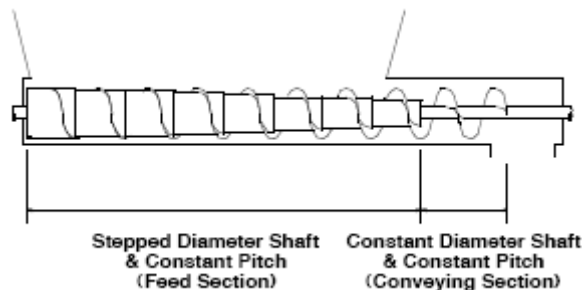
Stepped shaft Diameter Mass Flow Screw [42]
